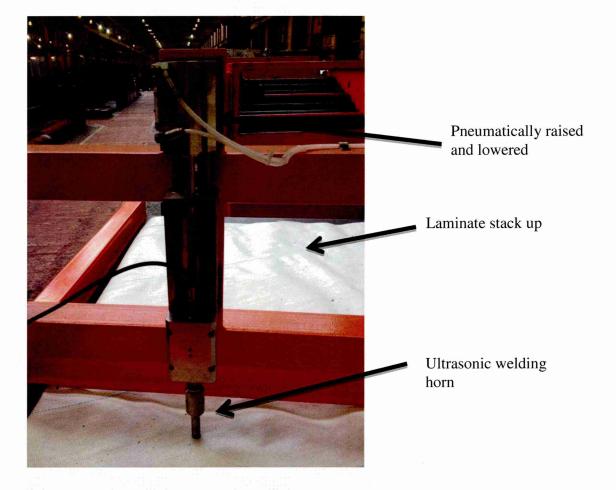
Stage 4 – Ultra Sonic Welding Unit
